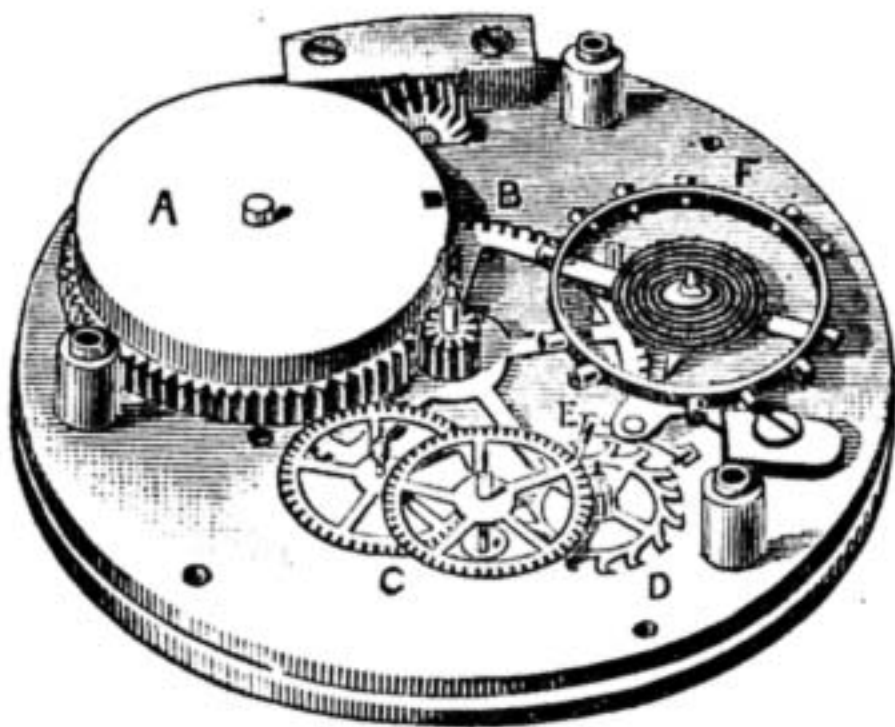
American Lever Waltham with Top Plate Removed—A, Barrel; B, Centre Wheel; C, Third and Fourth Wheels; D, Escape Wheel; E, Lever; F, Compensation Balance.
